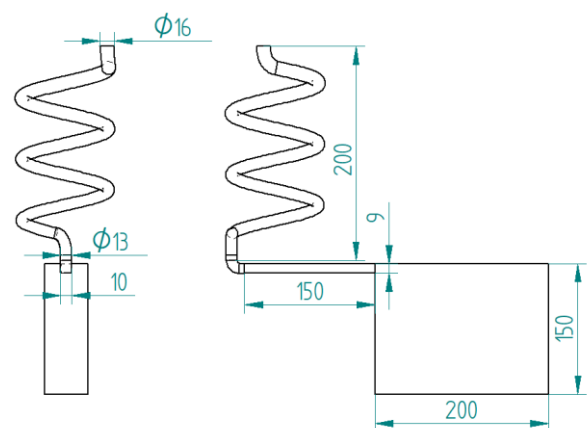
Dimensions of the spiral sprue gating system in relation to the casting.
